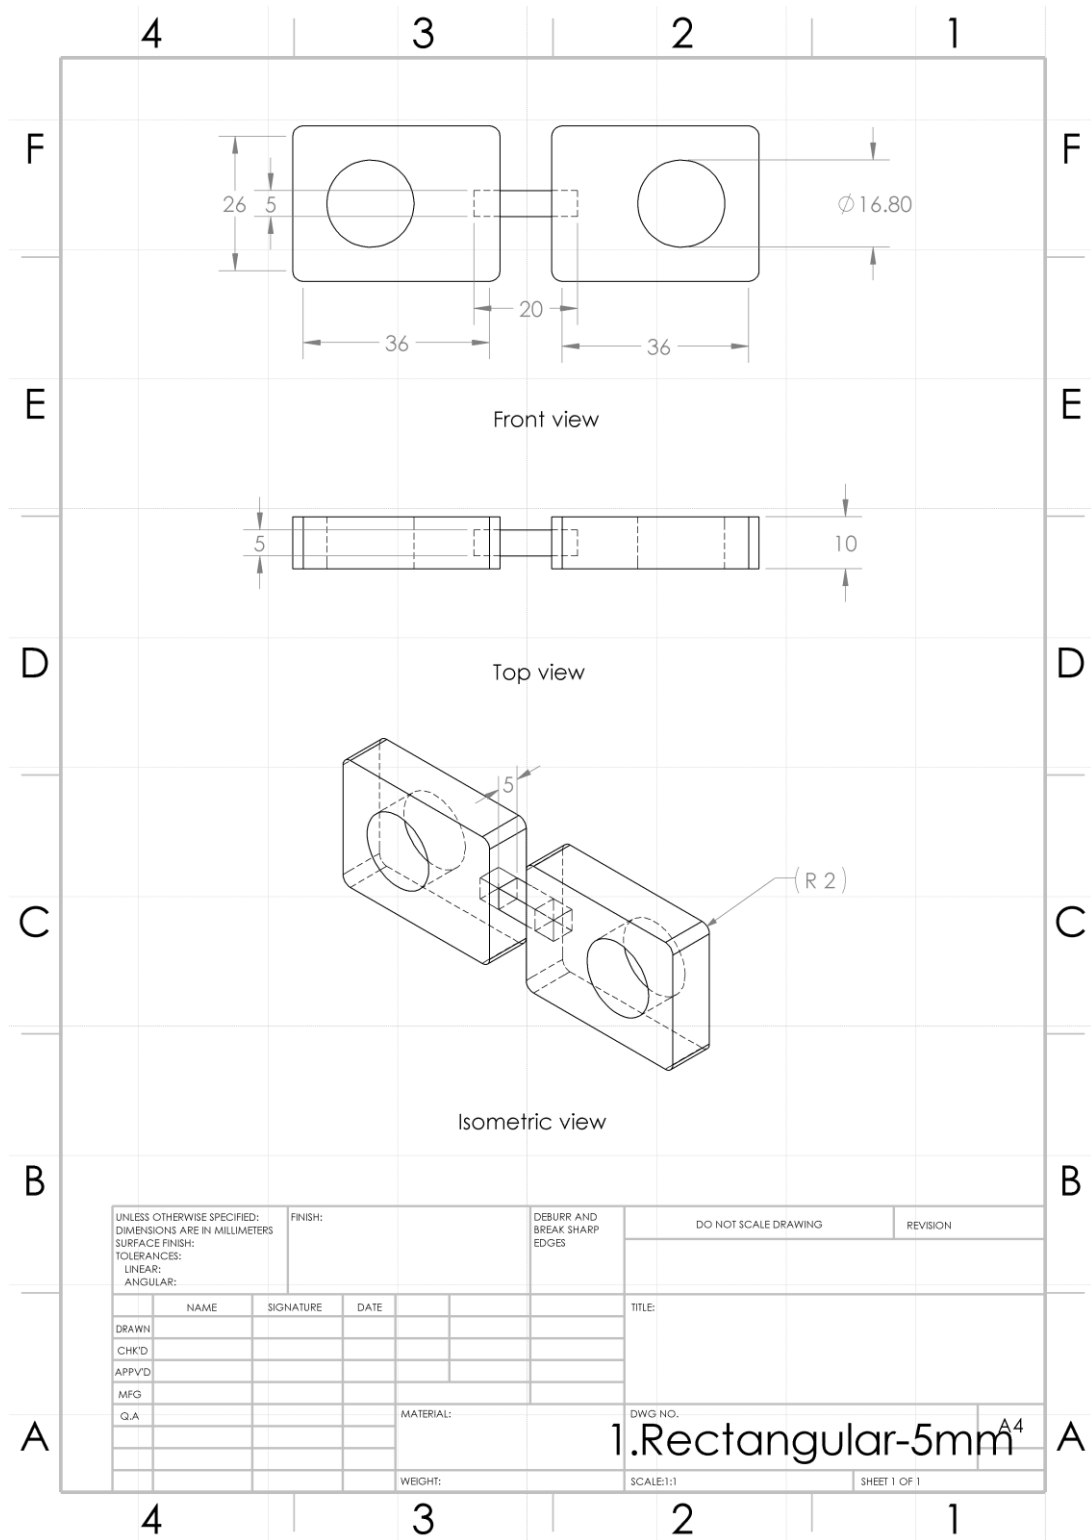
The technical drawing of the bi-material compliant mechanism with rectangular-shaped interface in 5 mm thickness
